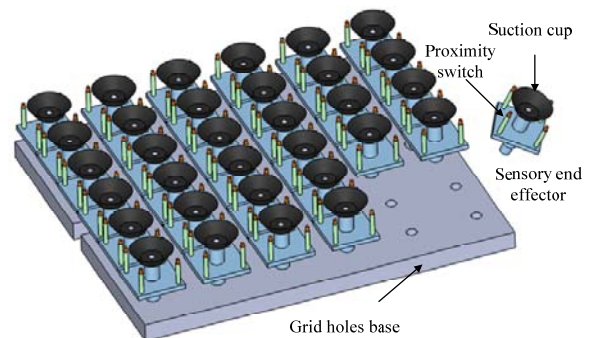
Configuration of the intelligent vacuum adsorption fixture.
